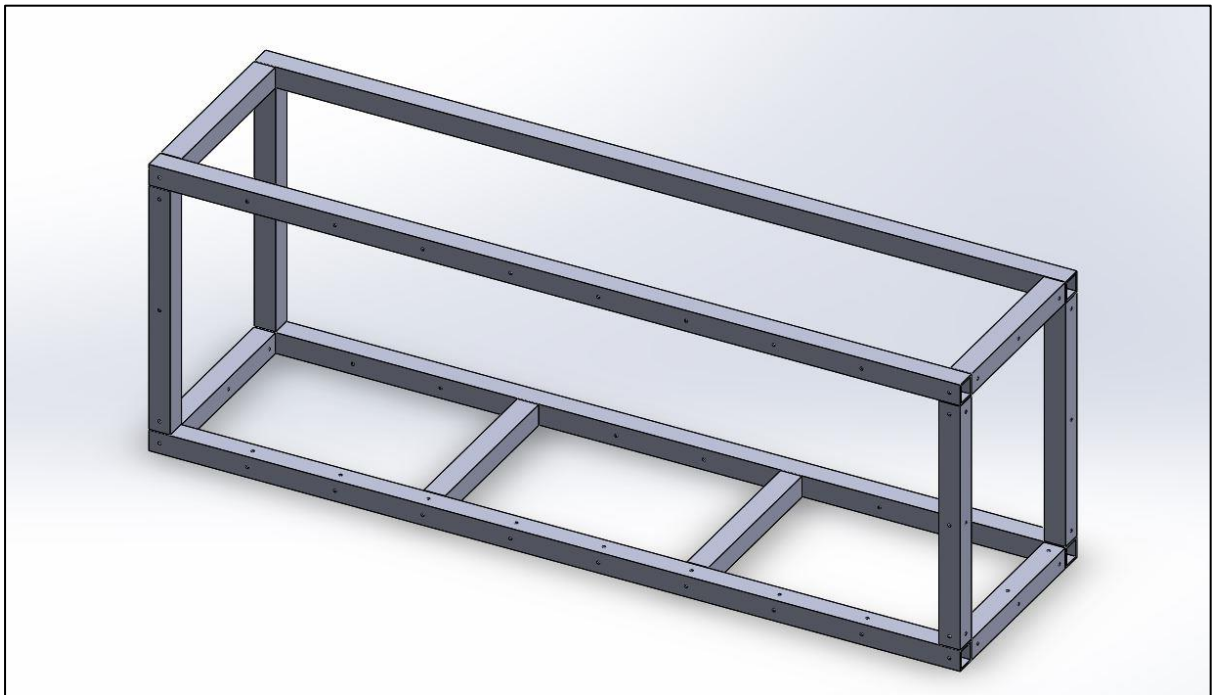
CAD Model of the Frame for Prototype 3.
